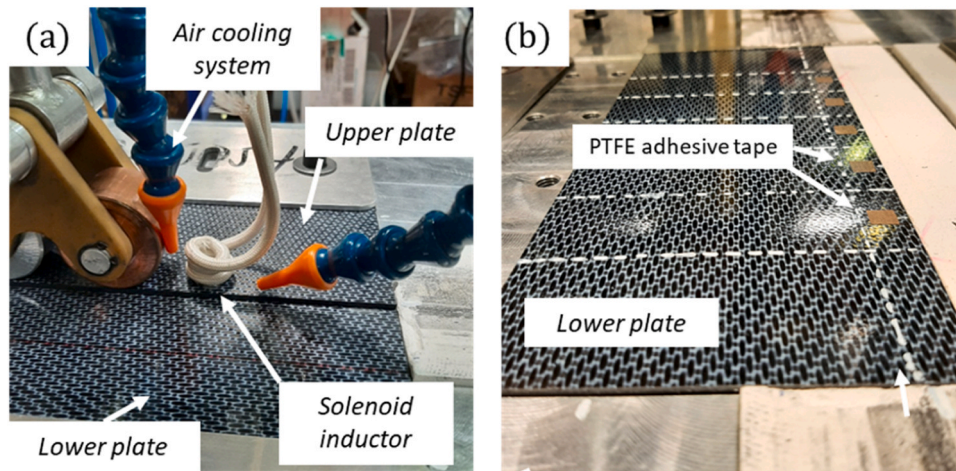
(a) Relevant components of Induction welding system. (b) PTFE adhesive tapes placed in the joint line for obtaining defective welds in a fully controlled way.
